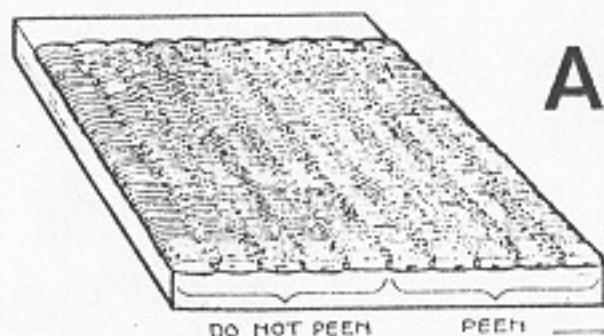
In learning to surface lay a pad of beads as shown here. Peen half of the welded plate.
